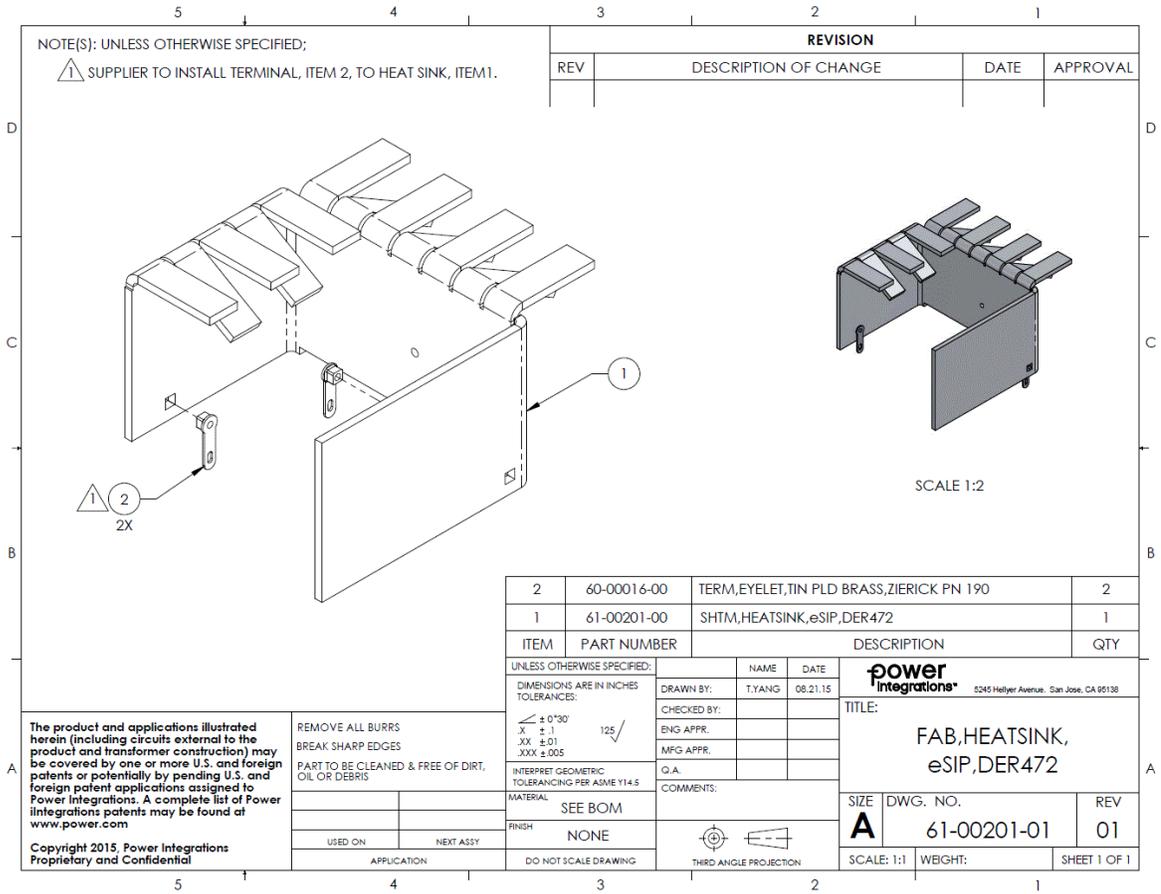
DER-472 – Finished Primary Heat Sink with Hardware.
